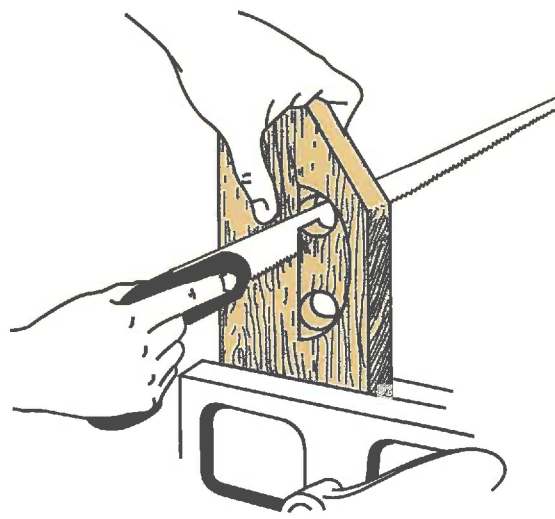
The offset dovetail saw can cut flush with the surface. (Brookstone)
